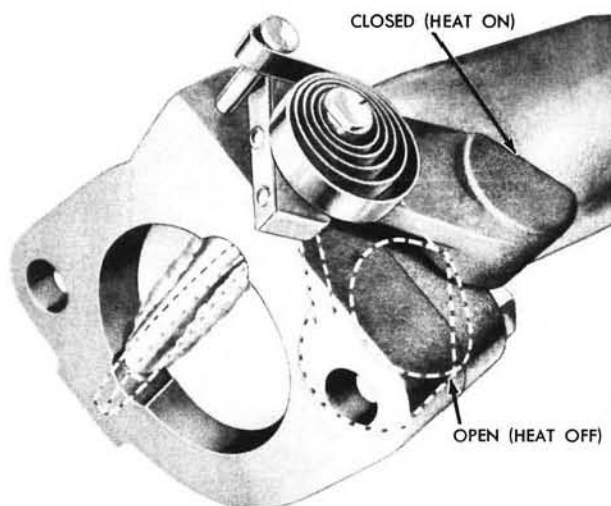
Exhaust Gas Control Valve—272, 292 MD V-8
